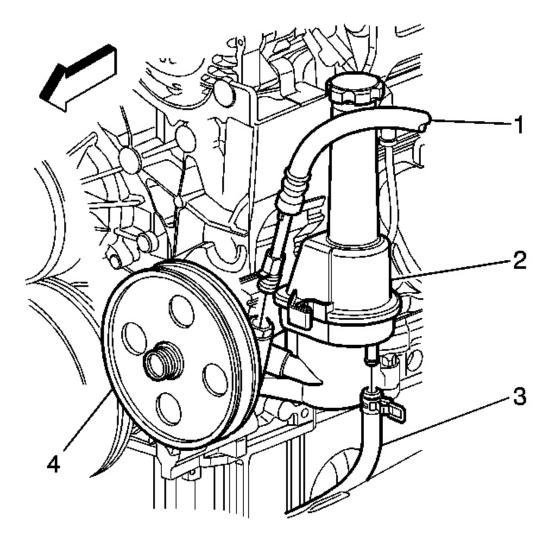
View Of Power Steering Pressure Hose, Return Hose & Pump Courtesy of GENERAL MOTORS CORP.
